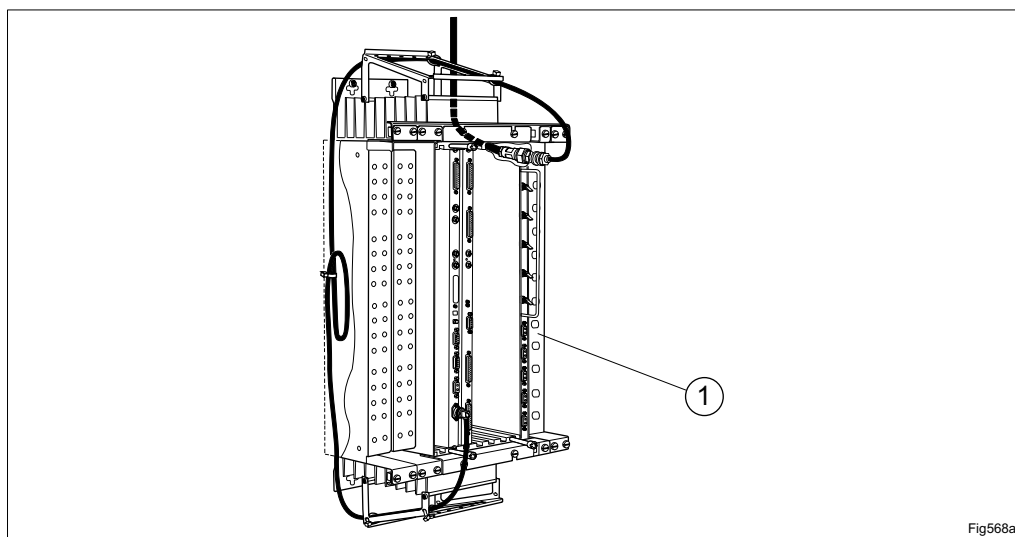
Using the radio cable panel, ①, in a wall installation.
